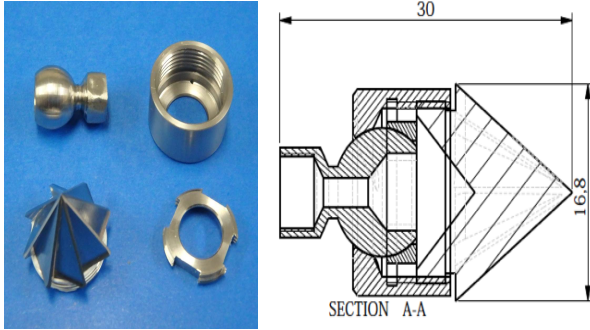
Components device (left). Assembled unit (mm)(right) .
